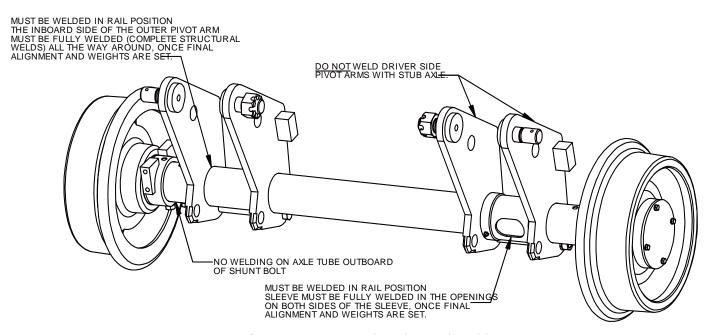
B Stub Axle Final Weld-out
